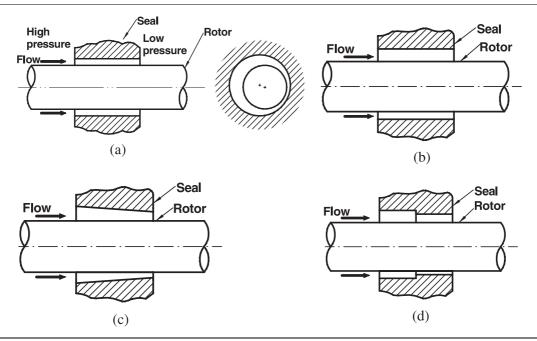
(a) Rotor-seal assembly. (b) Straight annular seal. (c) Tapered annular seal (converging). (d) Stepped annular seal.
